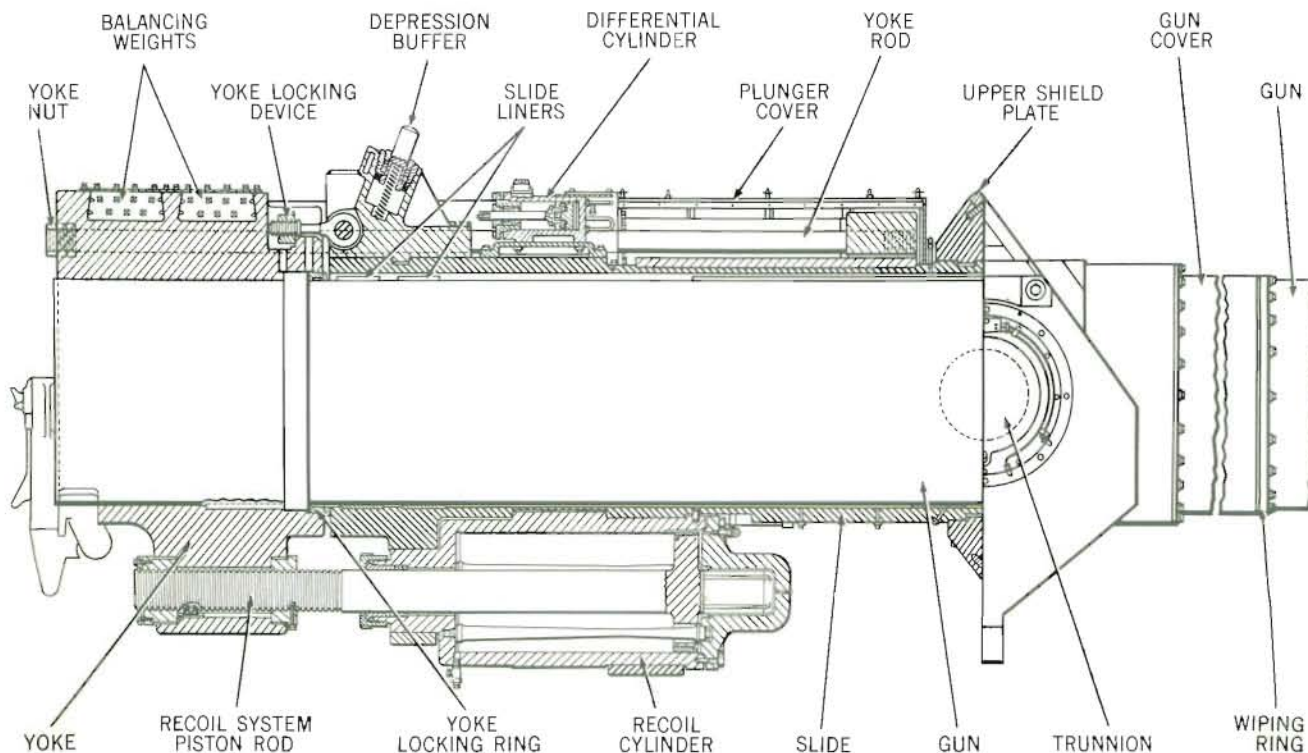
16-inch Gun Mk 7 Mod 0 and Slide Mk 6 Mod 0, General Arrangement, Sectional View
